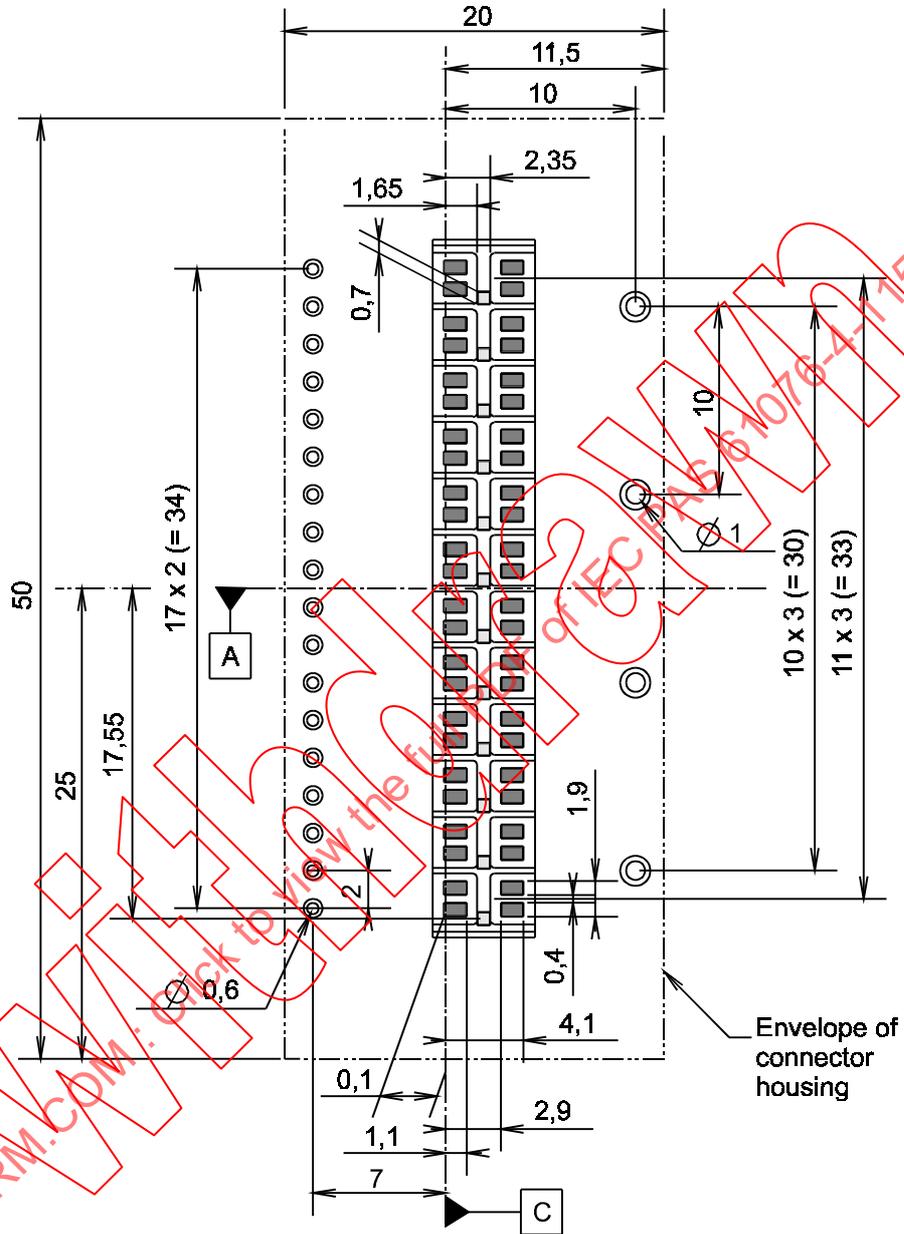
Footprint on backplane for press-in / compression mounted fixed connector
